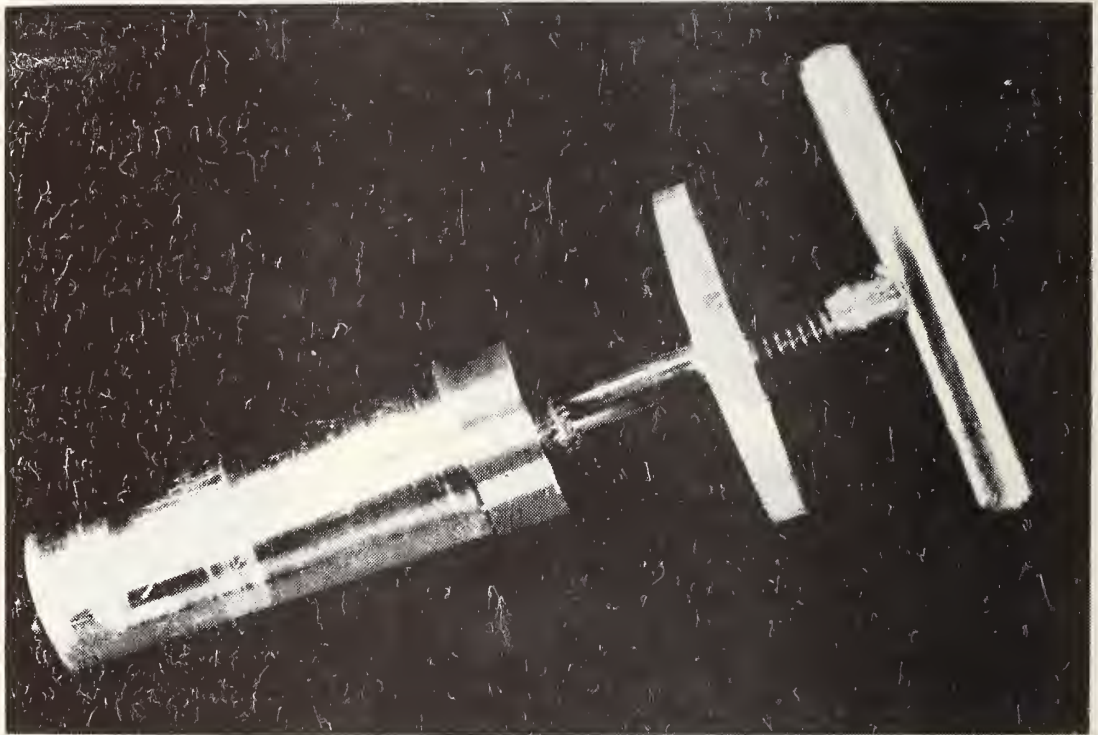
Original machined 304 stainless steel electrode. Most of the exposed surface has been coated with laquer to reduce contact with the environment.
